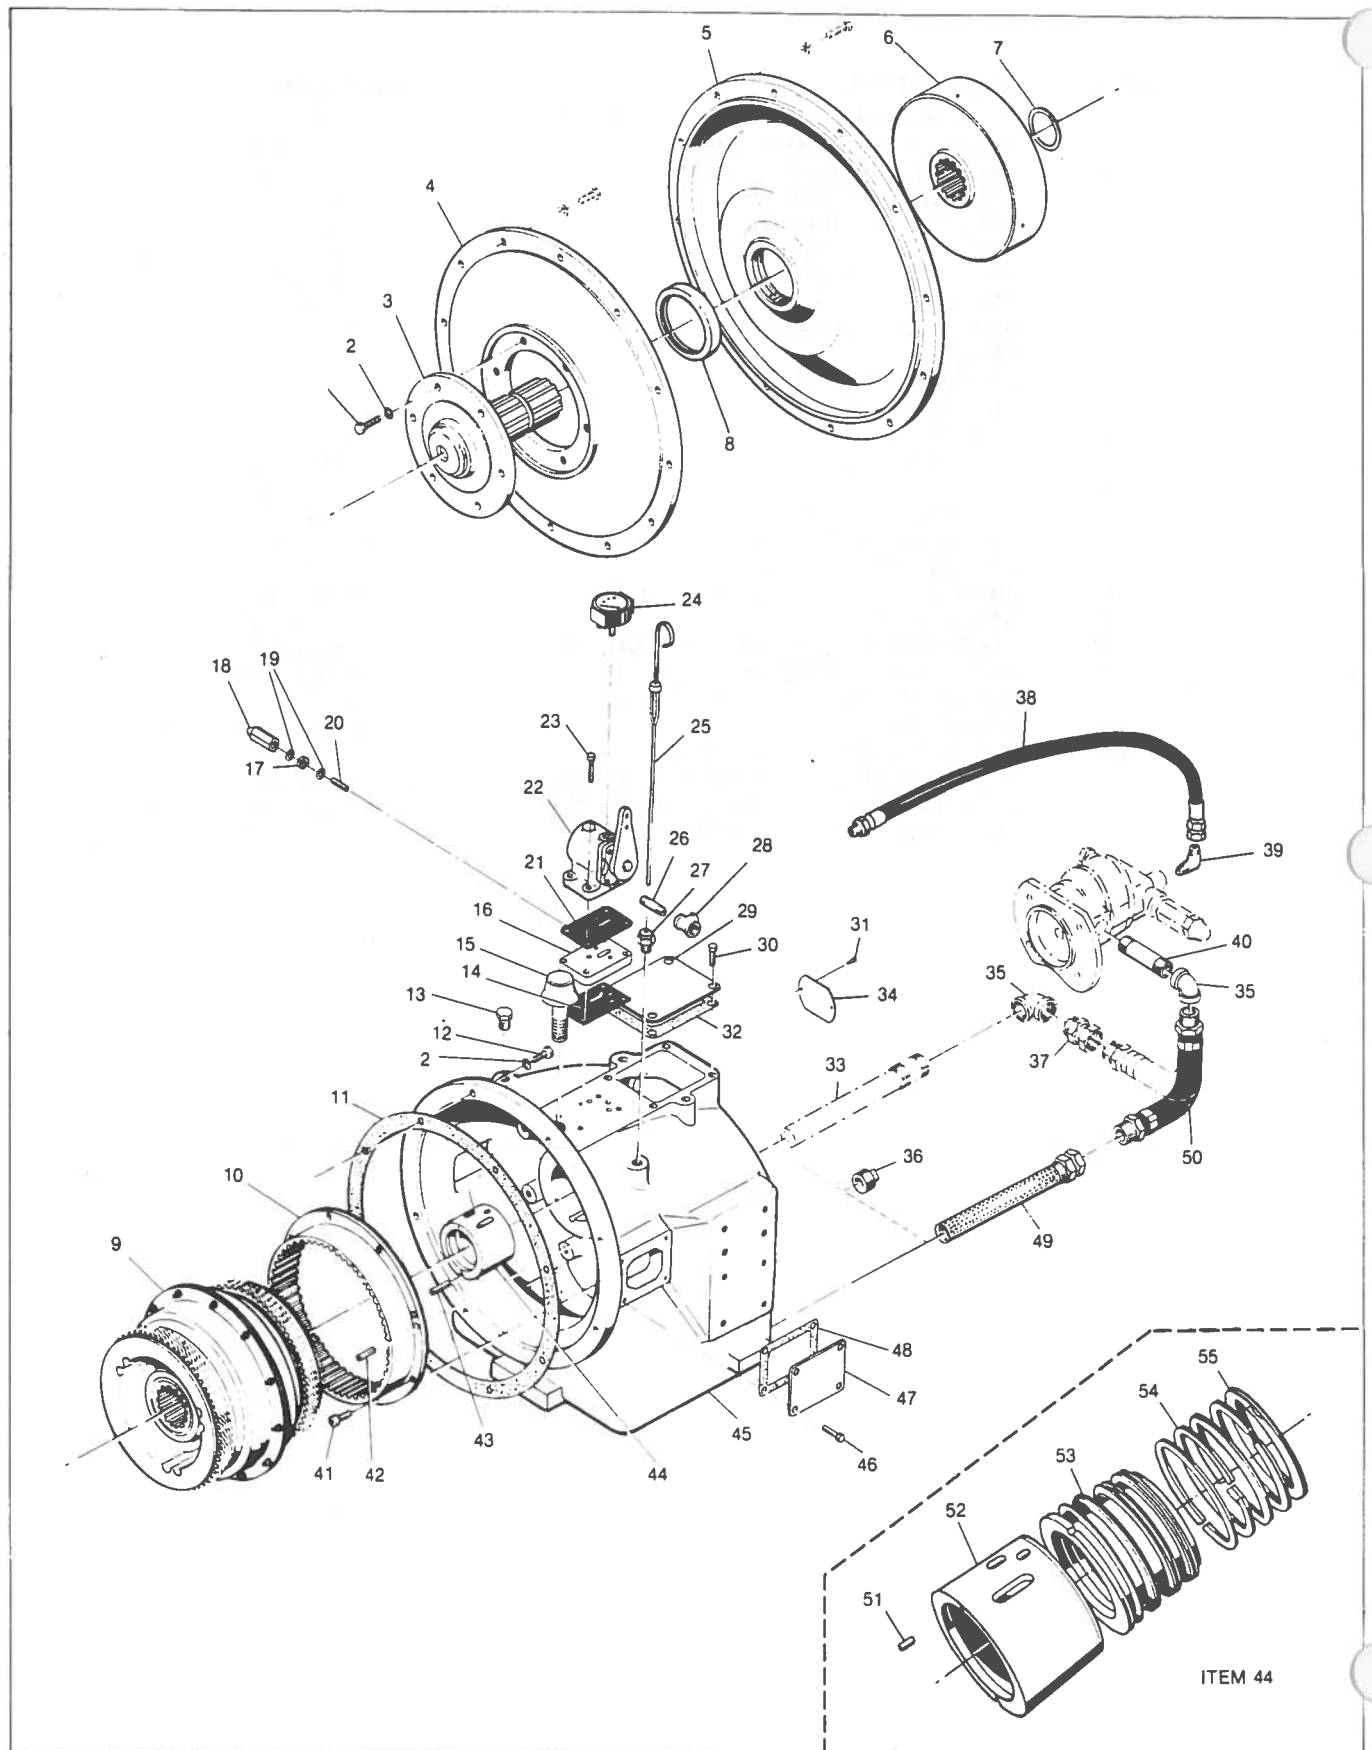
Transmission Assembly, Part A. Housing Related Parts, Including Adapter Parts
